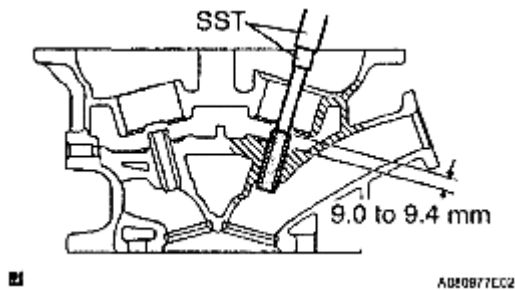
Taping Guide Bushing In To Specified Protrusion Height
